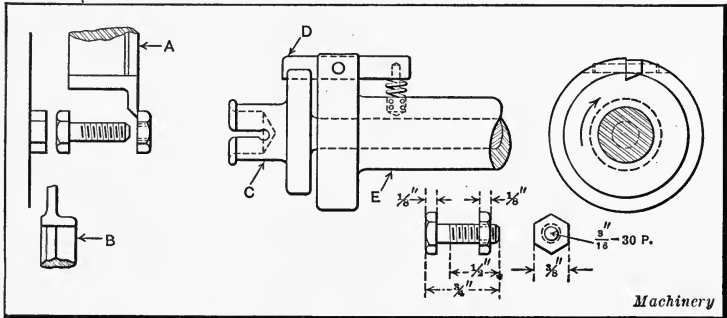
Method of Applying the Circular Tools; the Carrier or Assembling Tool, and Nut and Bolt to be made and Assembled
